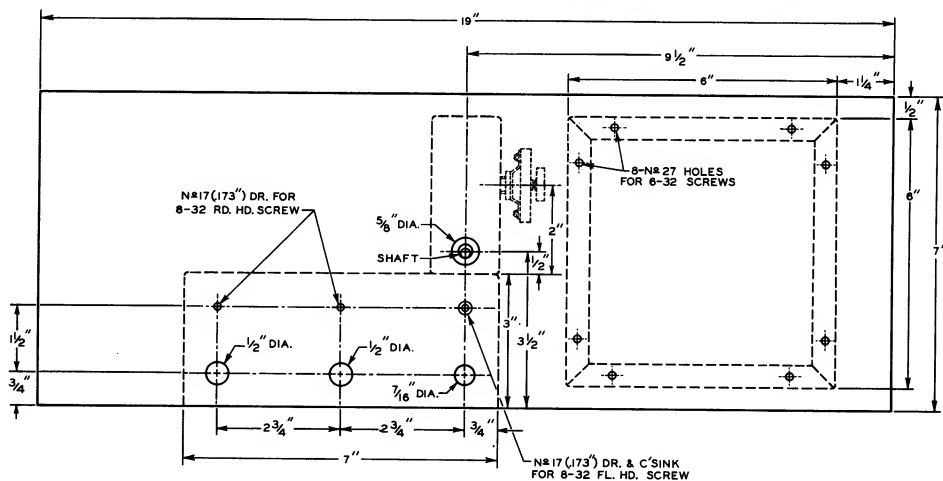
Panel-layout drawing showing the location of the power-supply chassis, VFO box, and the dial gear box.
